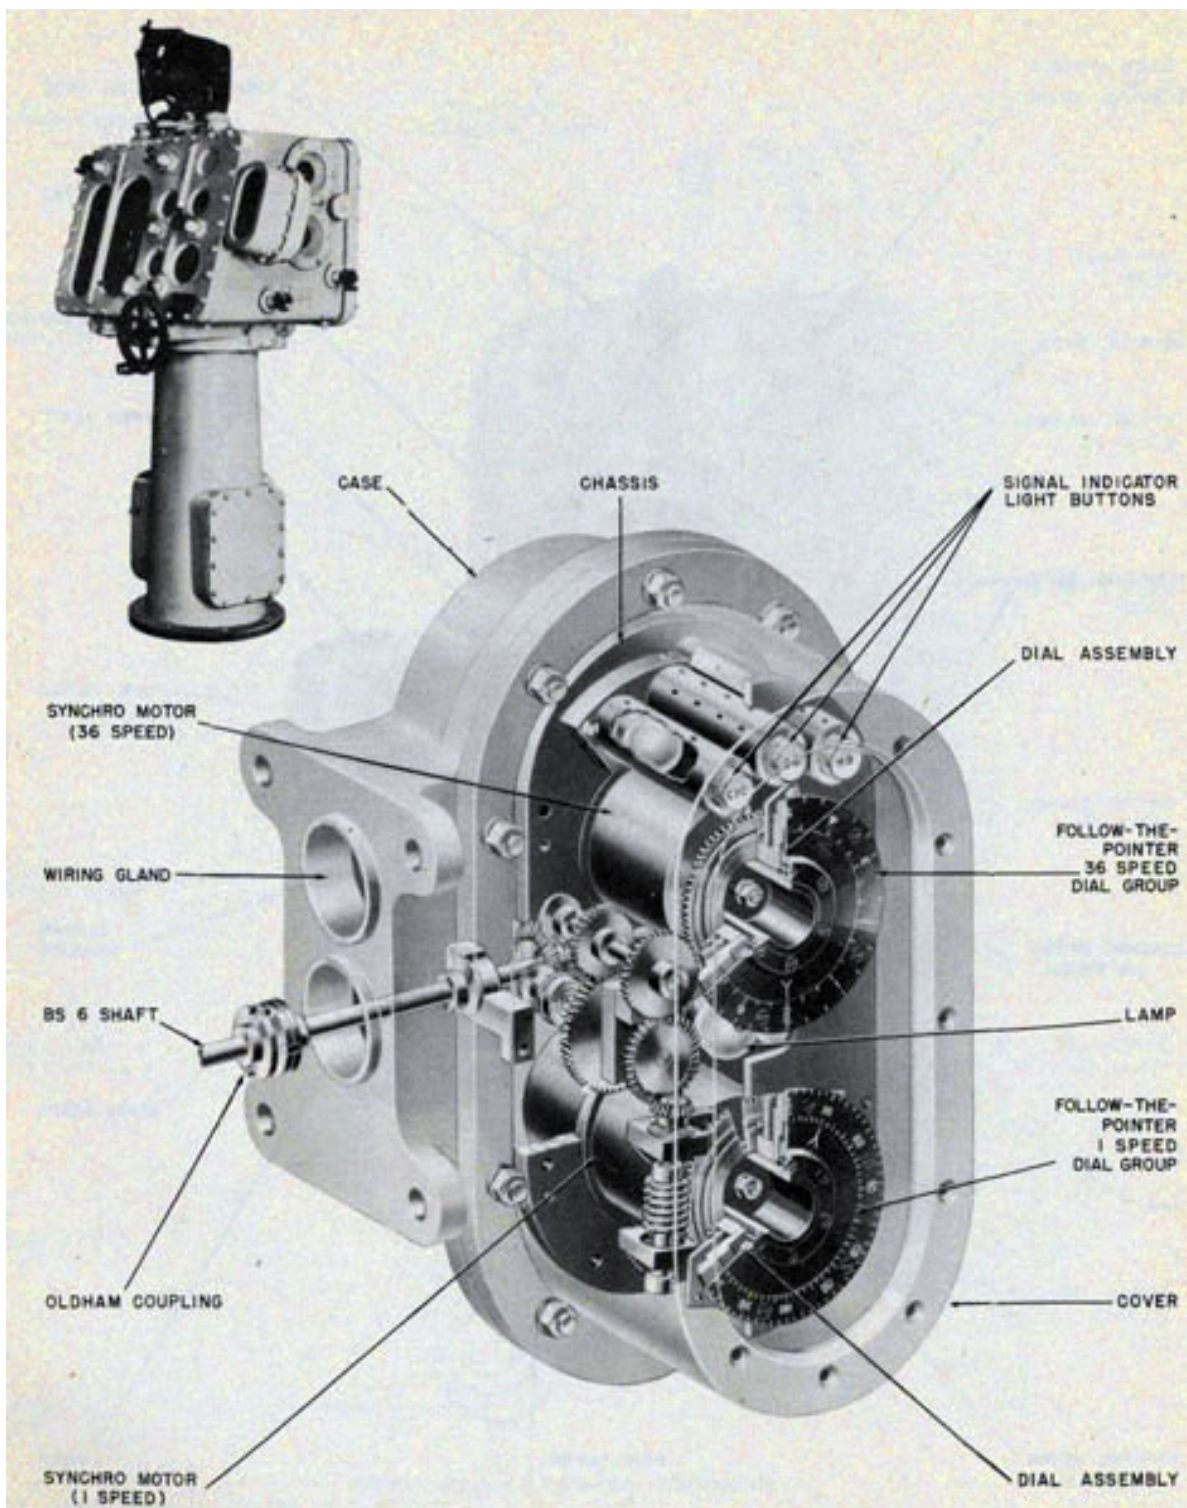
Cutaway of internal lighting type bearing receiver showing indicating signal lamps gearing and dial details.
